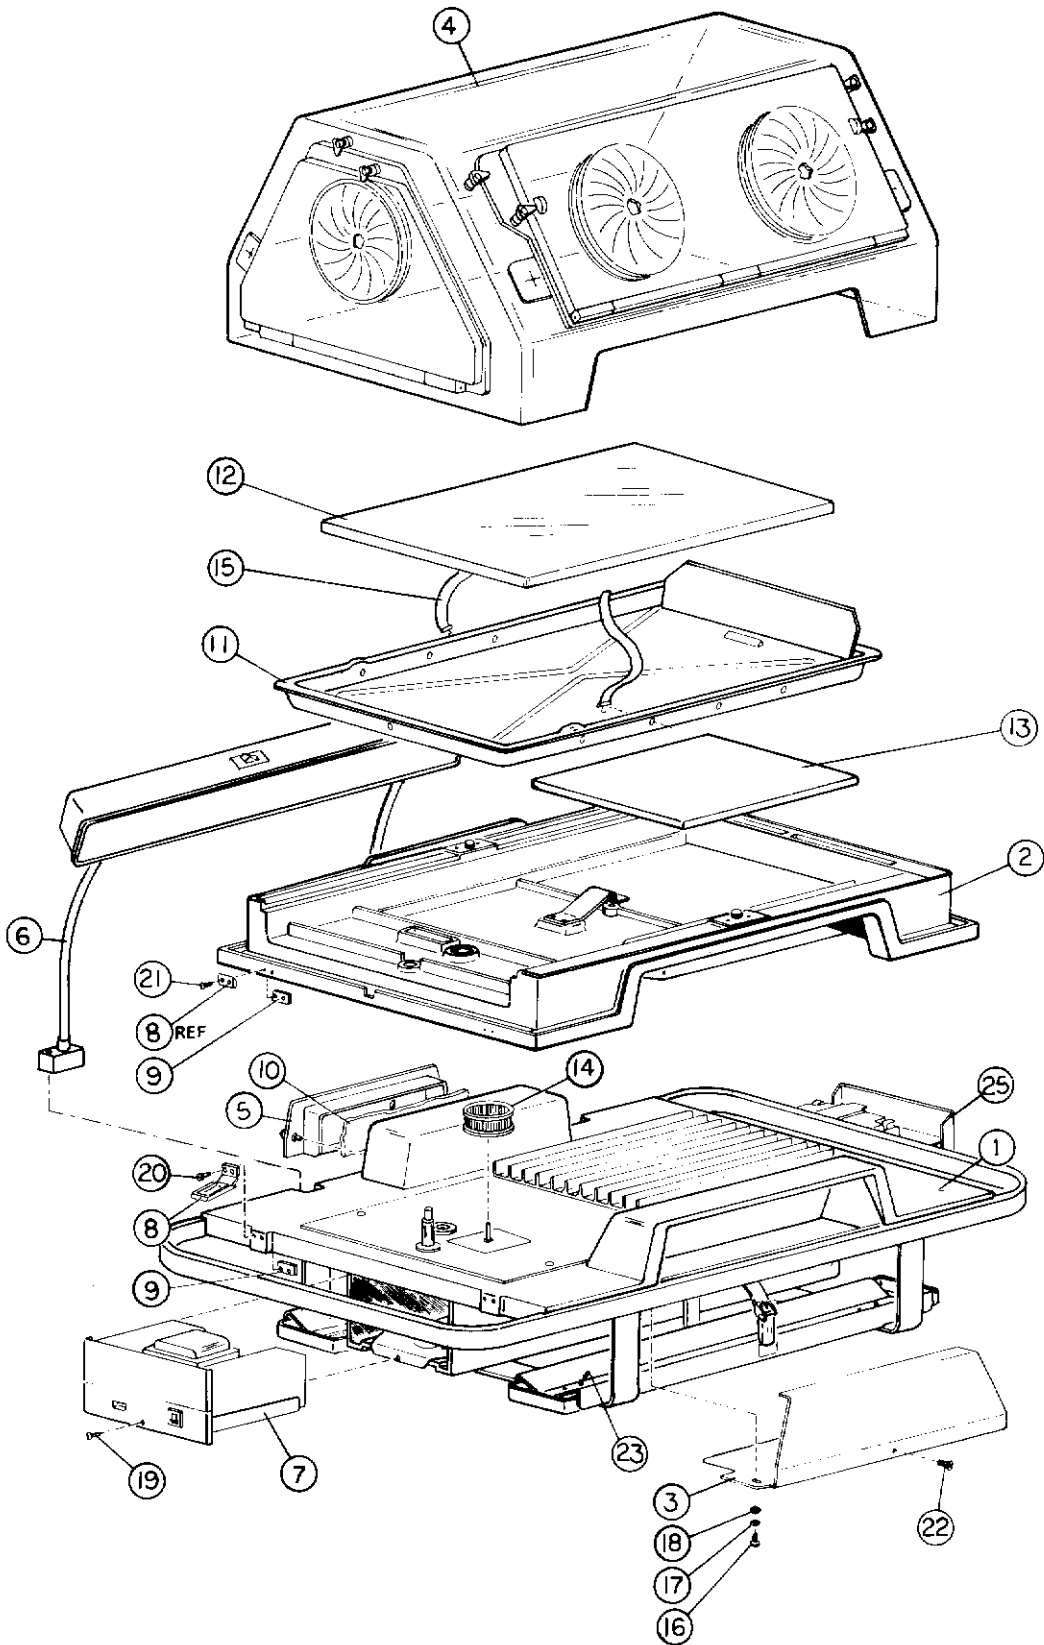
PARTS LOCATION DIAGRAM, BASIC ASSEMBLY
